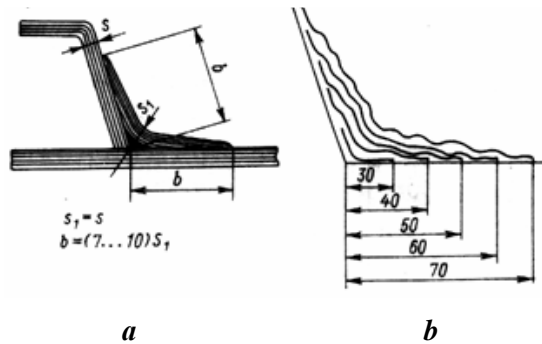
a - scantling of matting-in connection; b - diagram of laying-up layers of glass mat or glass fabric strips
